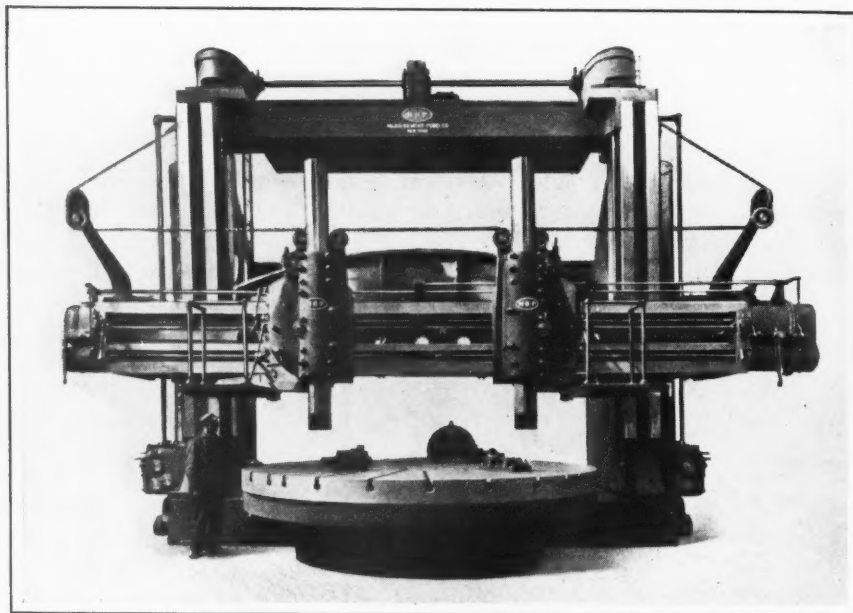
Niles-Bement-Pond Large Vertical Boring and Turning Mill
